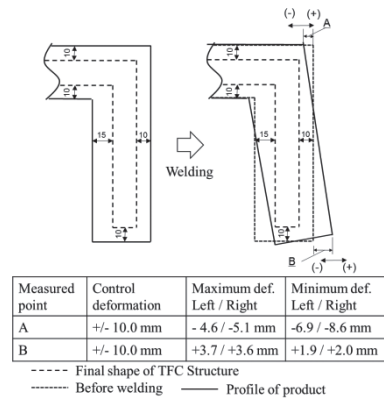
Welding deformation of 1st actual B1 basic segment (after Step-1 in Fig. 2)
